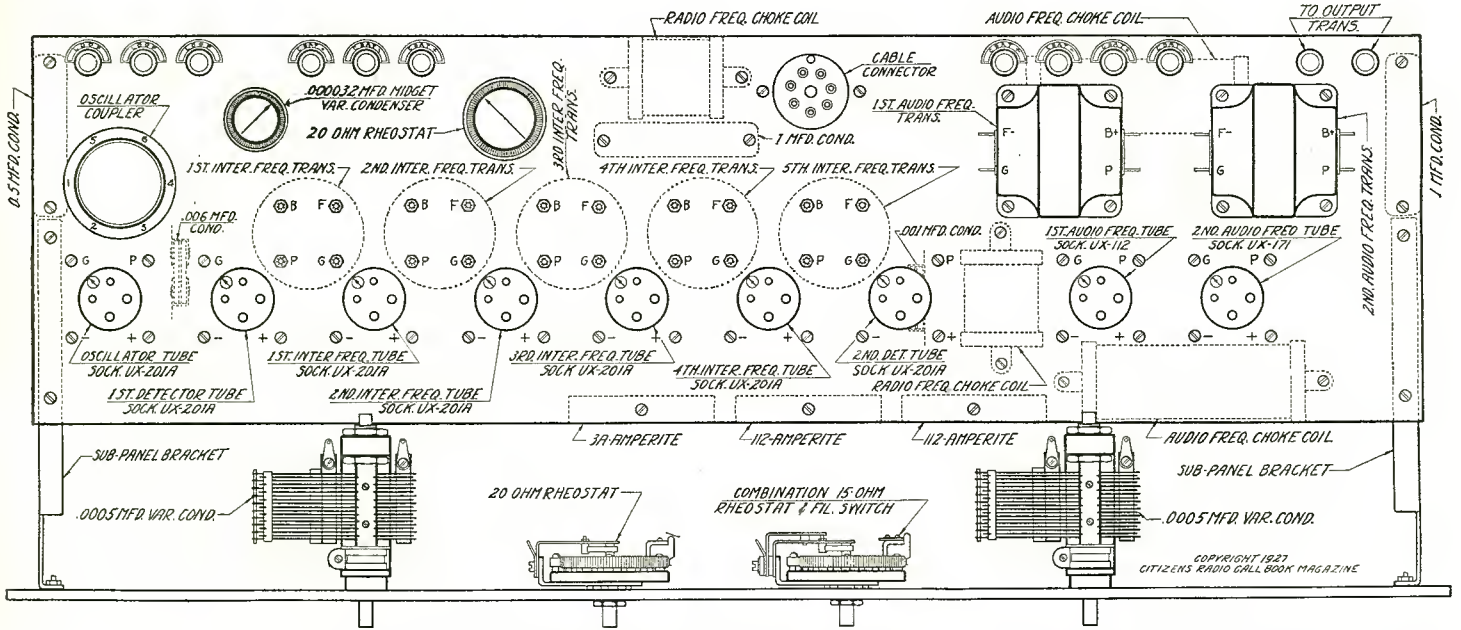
From this illustration the constructor may learn the location of all parts in this receiver. These parts should be laid out exactly in accordance with this sketch so as to permit simplest of wiring
